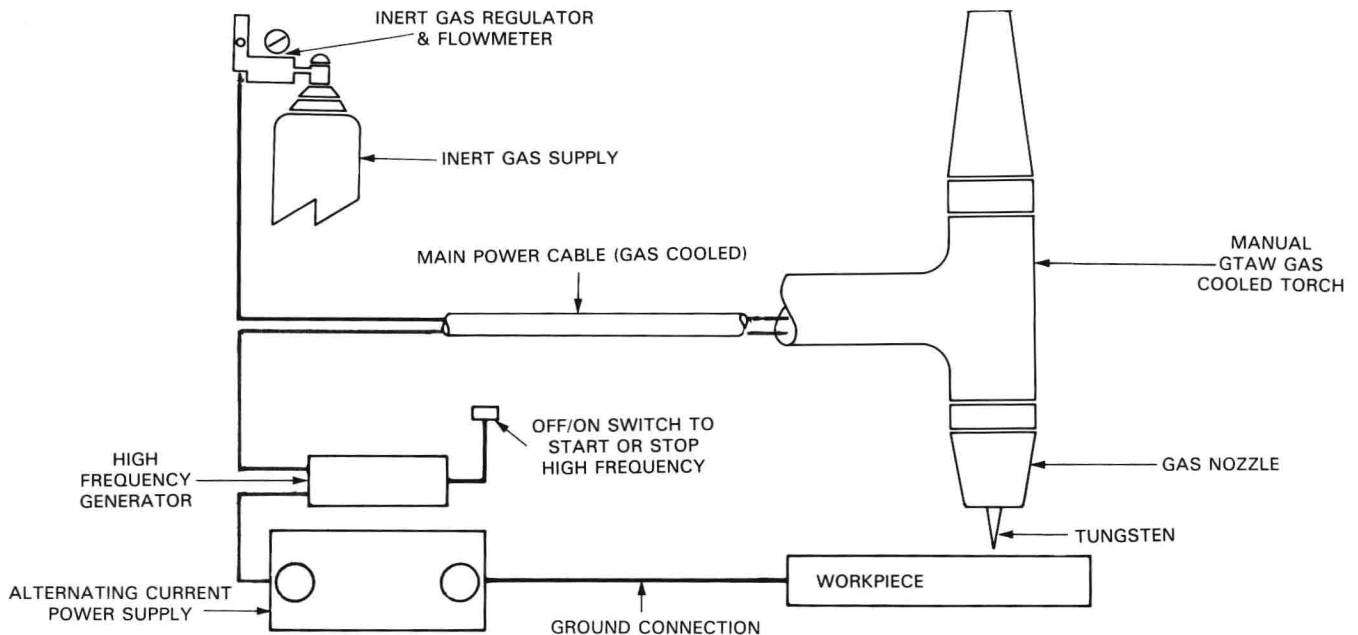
An alternating current power supply and a high frequency voltage generator are required to weld aluminum and magnesium.
